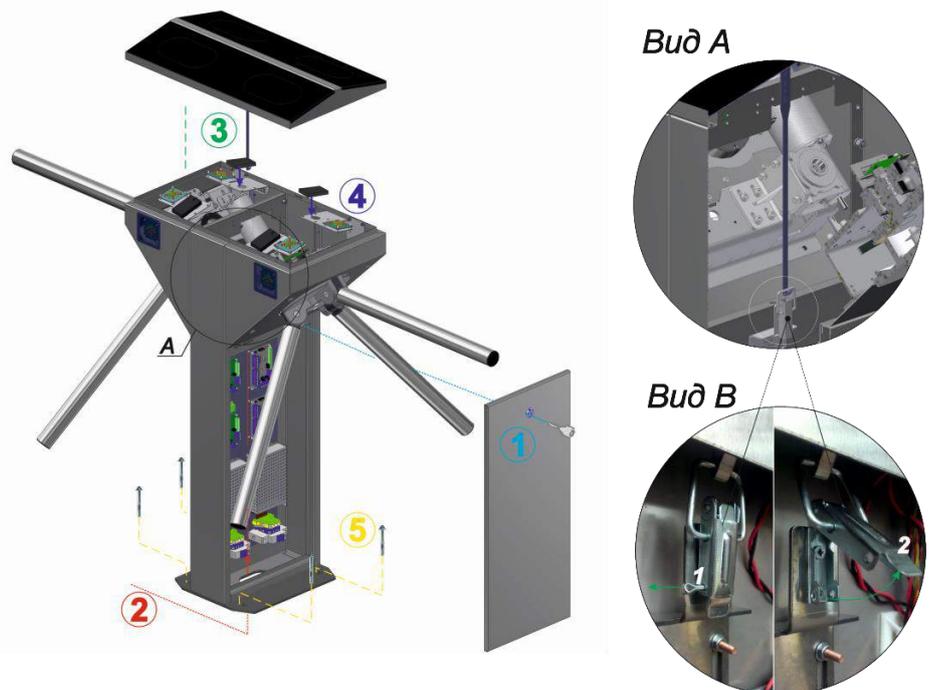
General view of the " CENTURION TWIN" and "BASTION TWIN" tripod turnstiles assembly
